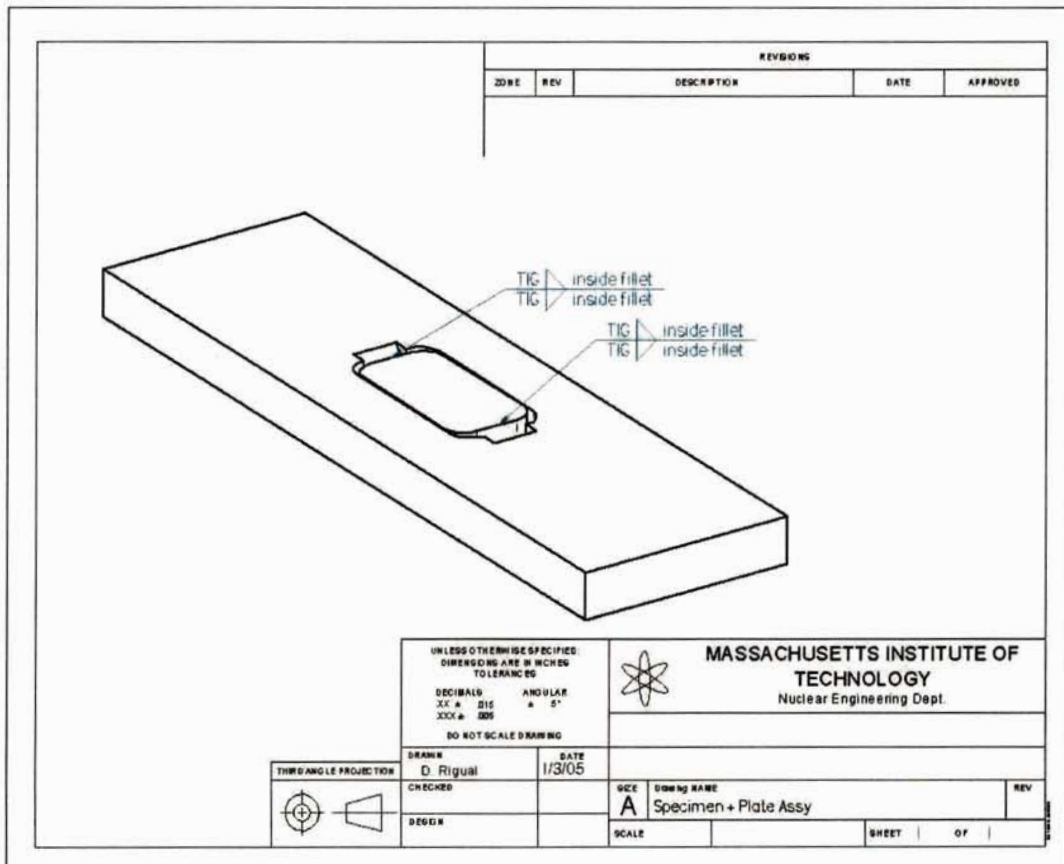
Cast specimen + plate stock welded assembly.
